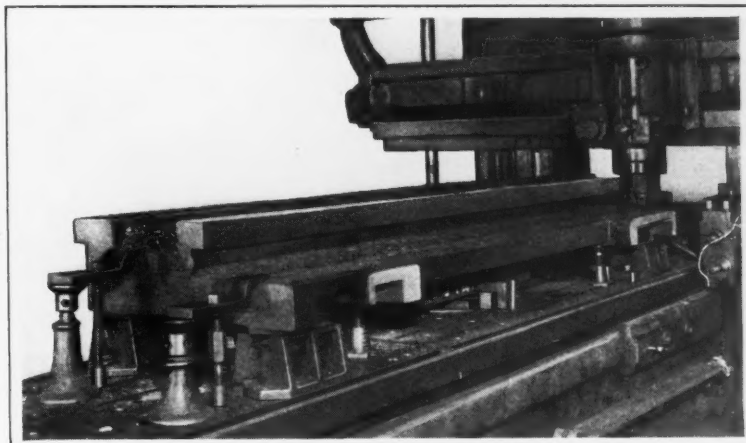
Employing the Chucks on a Rail-type Milling Machine
